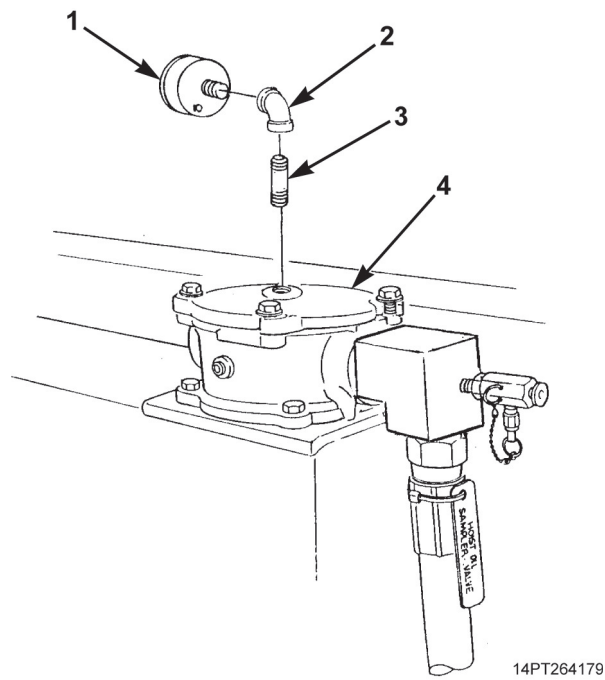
Hydraulic Oil Filter Service Indicator Gauge Removal.
